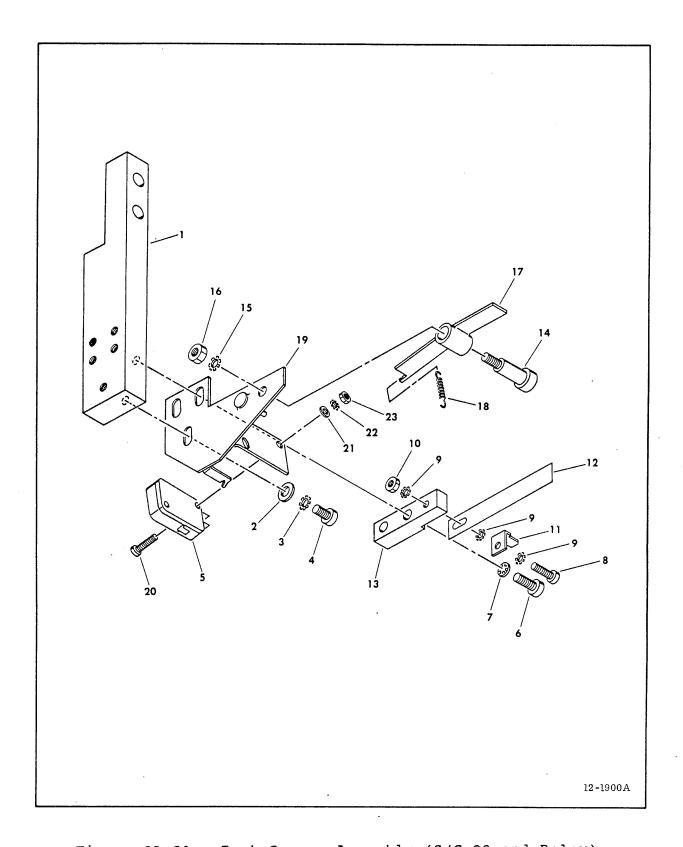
A-21. Pack Sensor Assembly (S/C 08 and Below)
